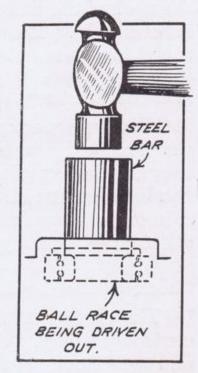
Driving WORN MAIN BALL-OUT FROM CLUTCH END.
